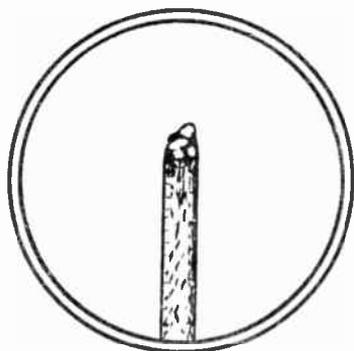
Sketch showing the appearance of a broken filament or heater (much enlarged).
